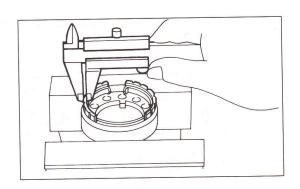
Vernier caliper being used to measure thickness of brake shoe.
